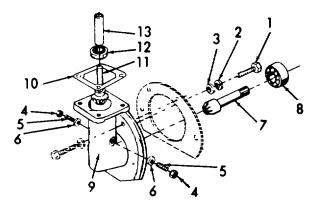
Governor Drive Assembly, Disassembly/Reassembly.
